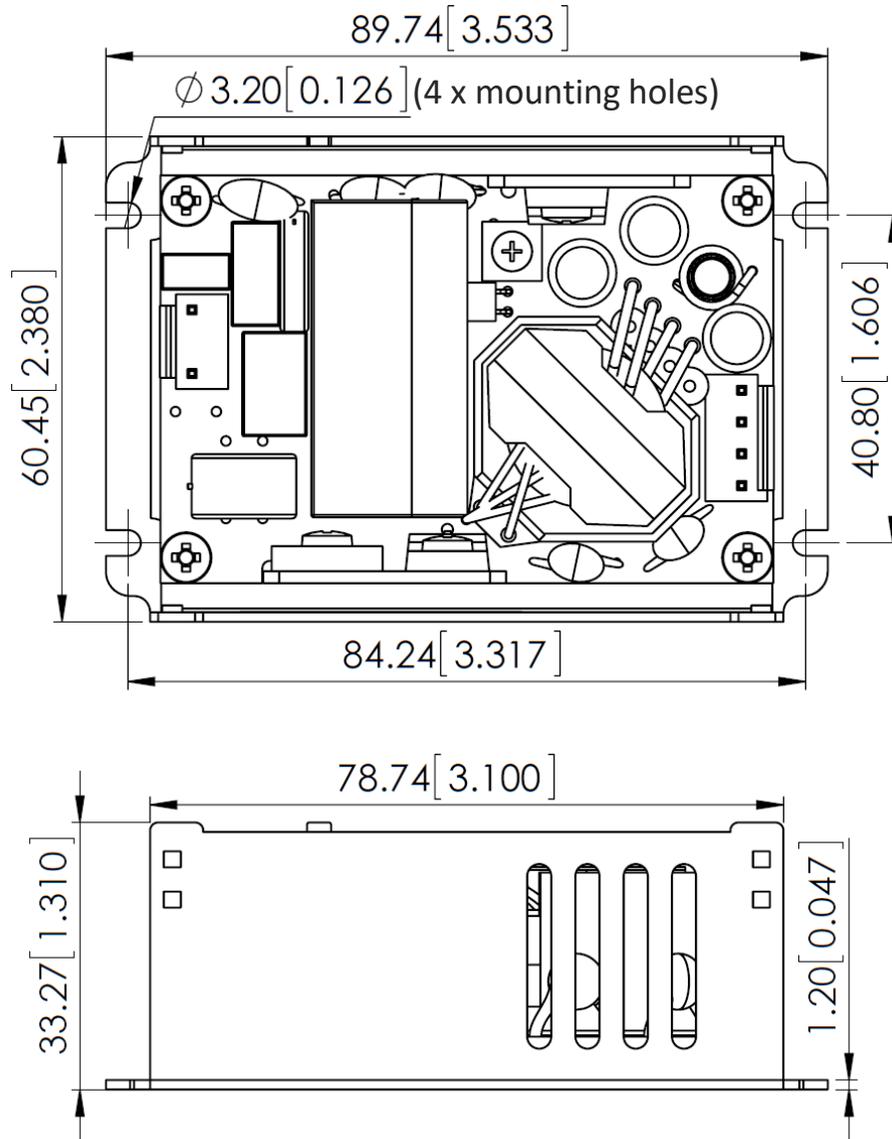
MLU40 models: Mounting Hole Locations and Dimensions
